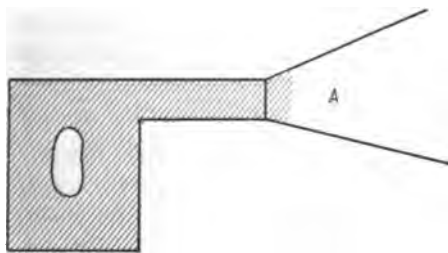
DIE CASTING CONTAINING SHRINKAGE HOLE.
